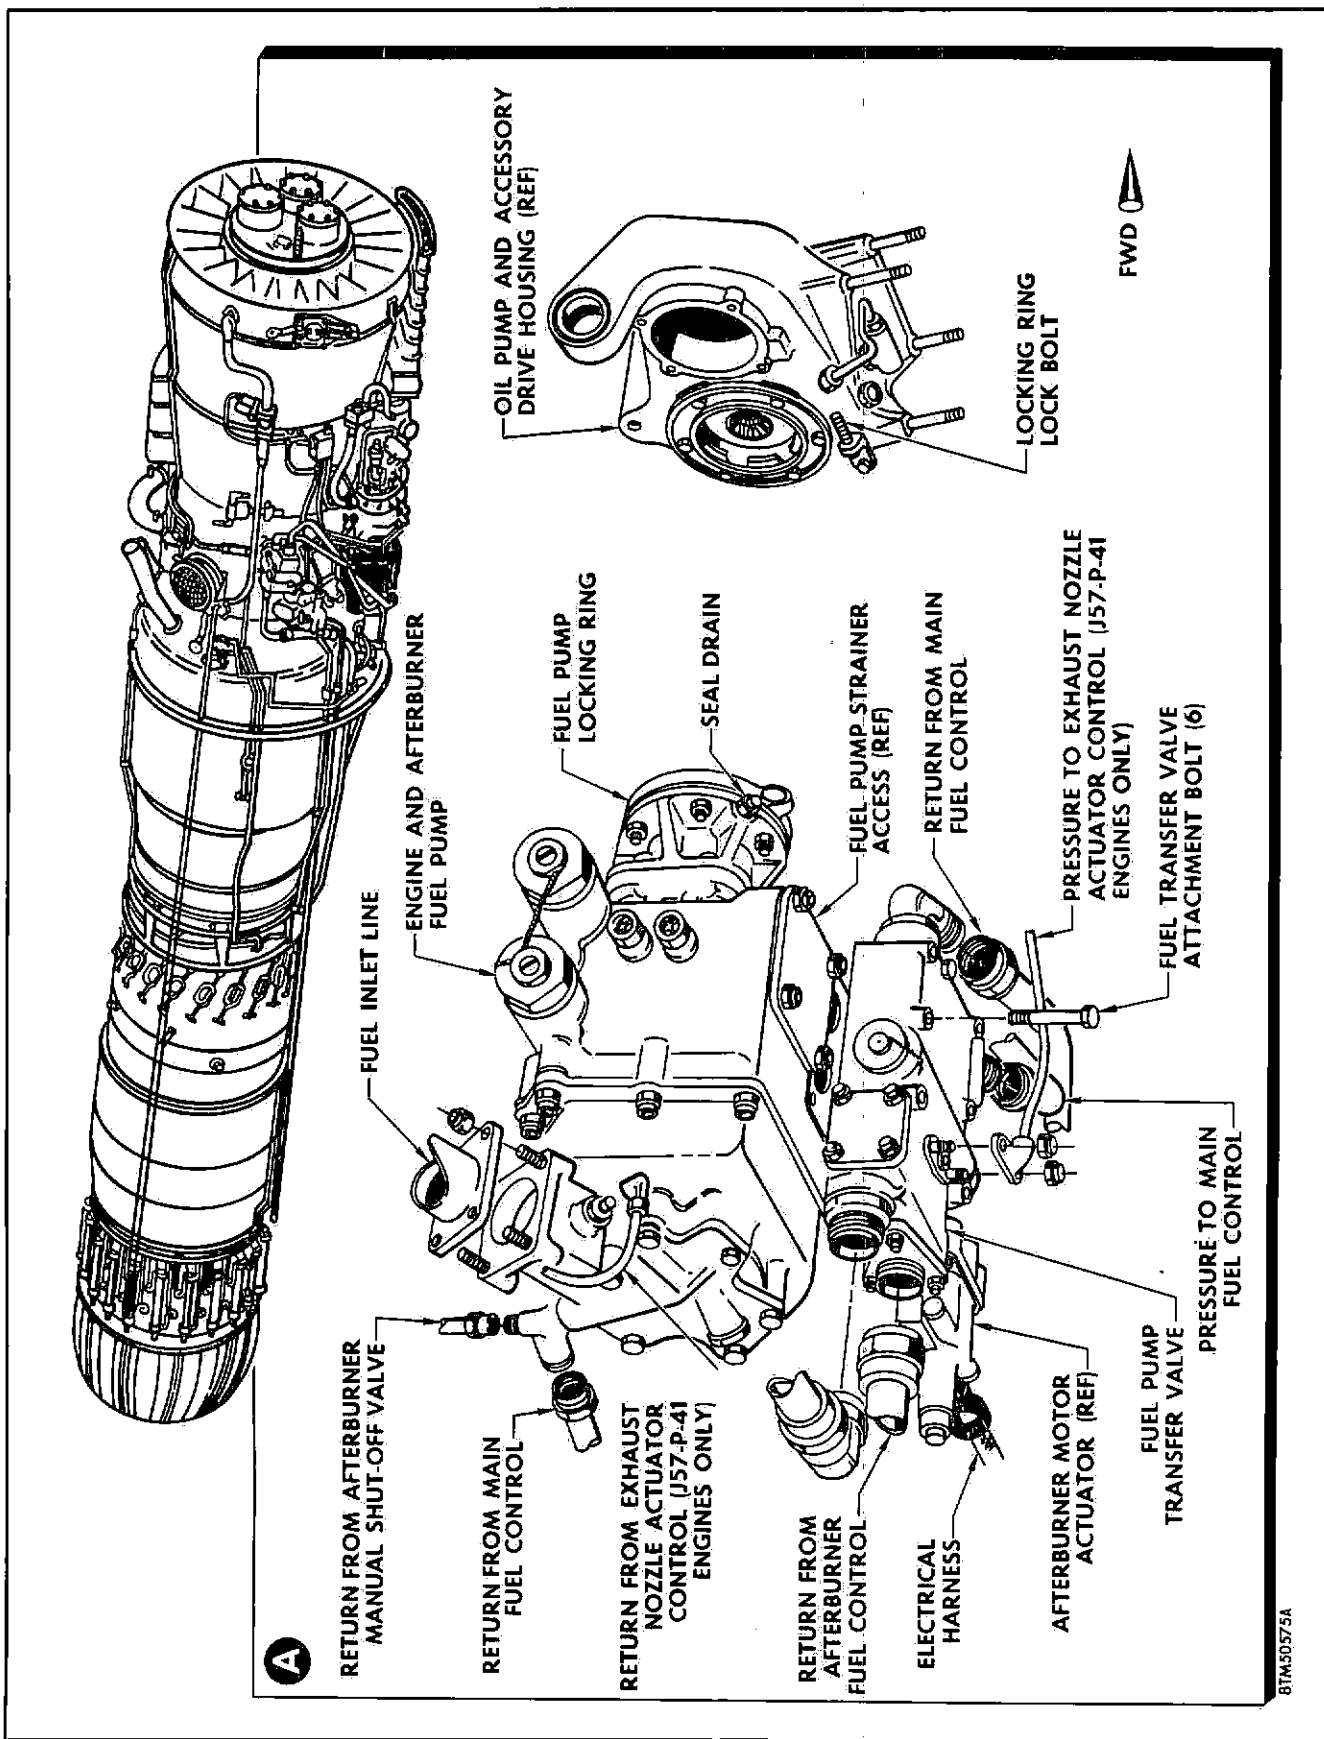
Engine-Driven Fuel Pump/Transfer Valve
